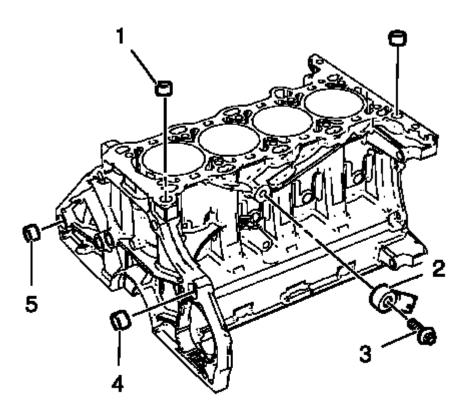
Piston Oil Nozzles And Bolts Courtesy of GENERAL MOTORS COMPANY
